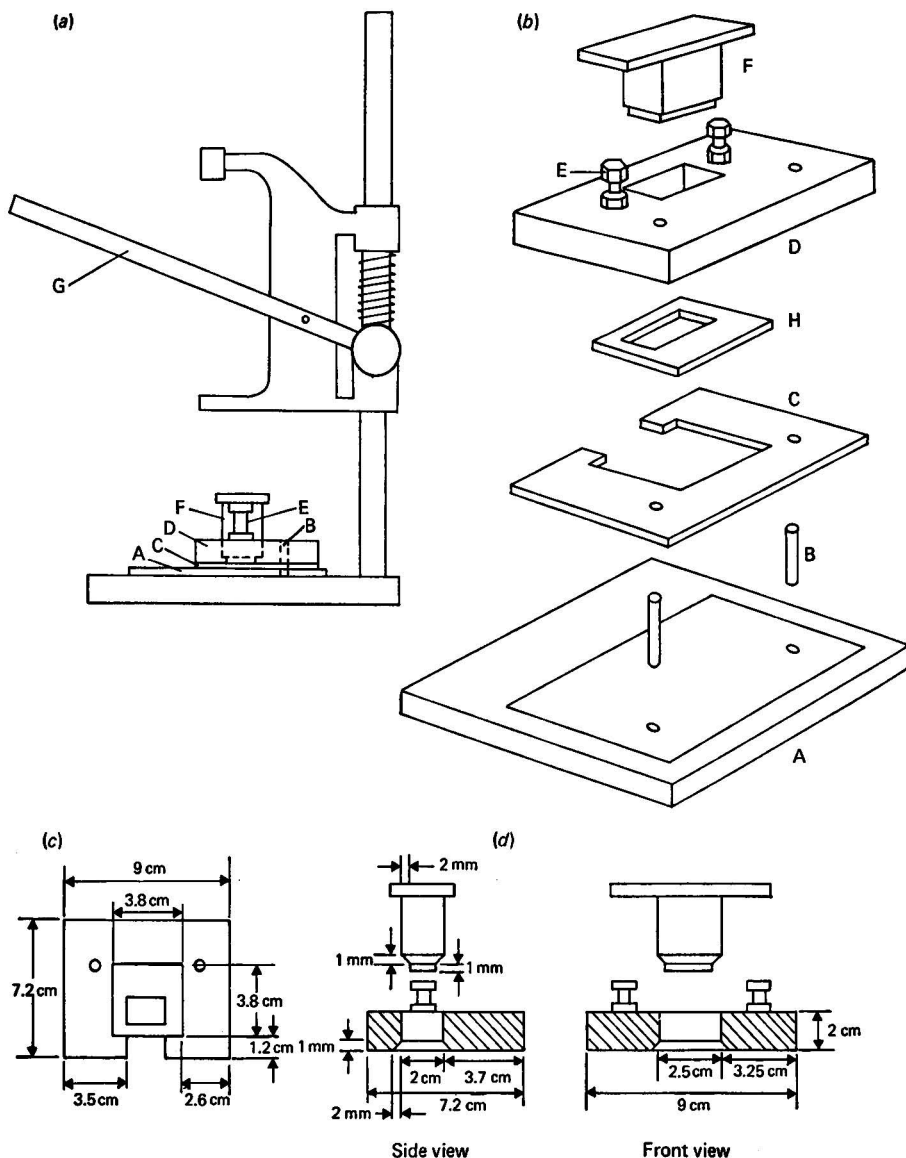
Diagrams showing the construction of the sample press (not to scale). (a), Side view. (b), Exploded view. A, Base plate, bolted to the base of the drill stand; B, locating pins; C, locating plate for sample holder; D, block; E, adjustable stops; F, plunger; G, strengthened arm for the drill stand; H, sample holder. (c), Locating plate with sample holder *in situ* (plate thickness and sample-holder thickness both approximately 1 mm). (d), Cross-sections through the block and plunger.
